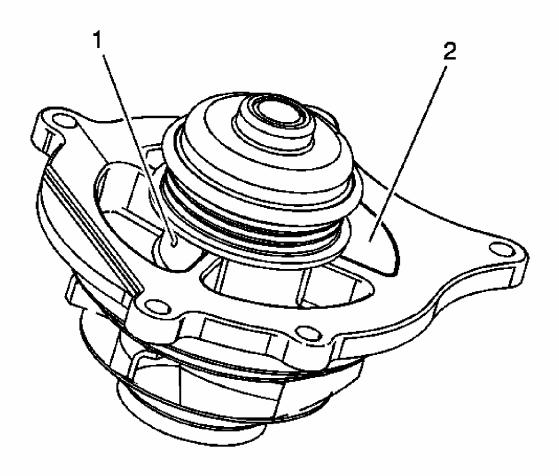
Identifying Water Pump Shaft Weep Holes Courtesy of GENERAL MOTORS CORP.
